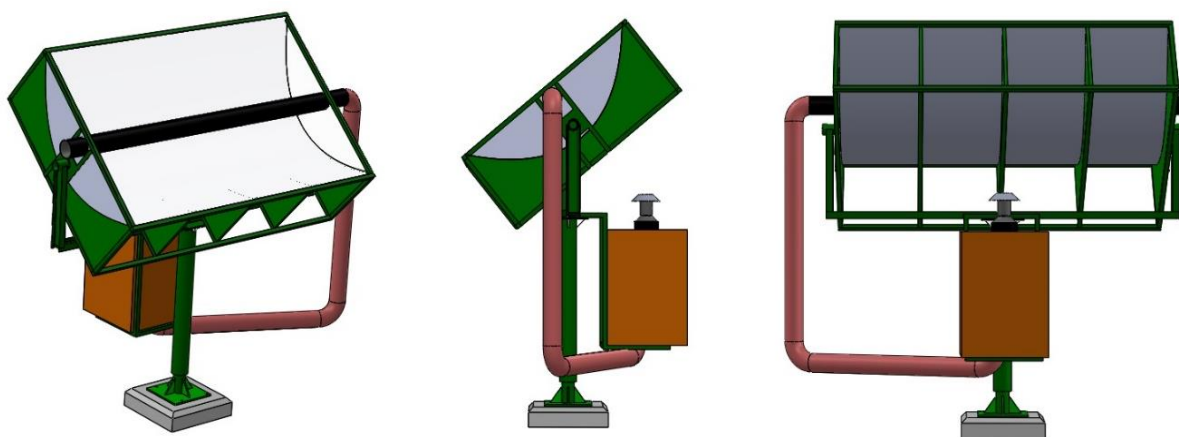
The projection views of the new solar dryer prototype were designed using SolidWorks
